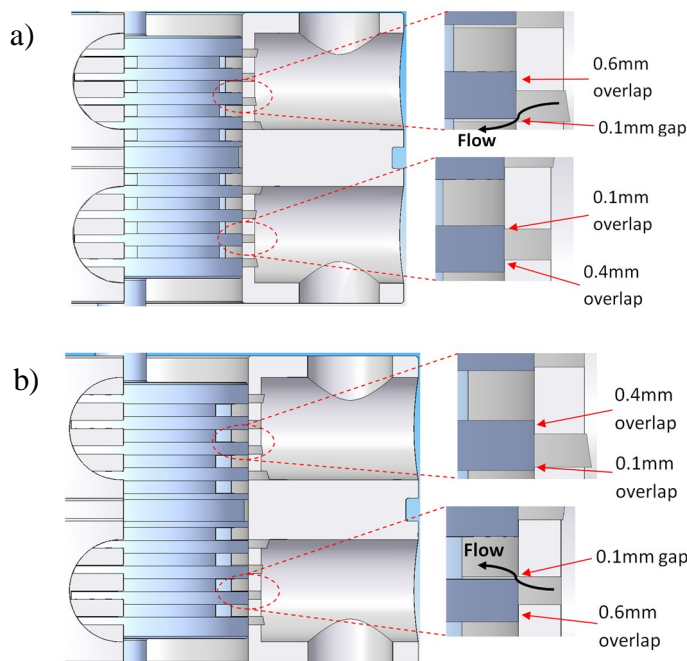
Cross-section view of the spool – sleeve, a) extreme upper spool location, b) extreme lower spool location
